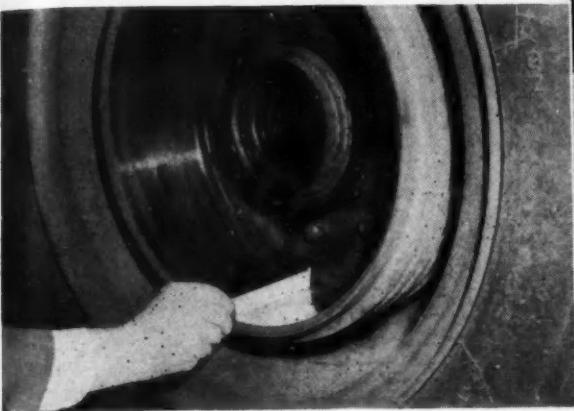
A case of brake drum failure at 40,000 miles. Heat caused checking which shaved away the brake lining
